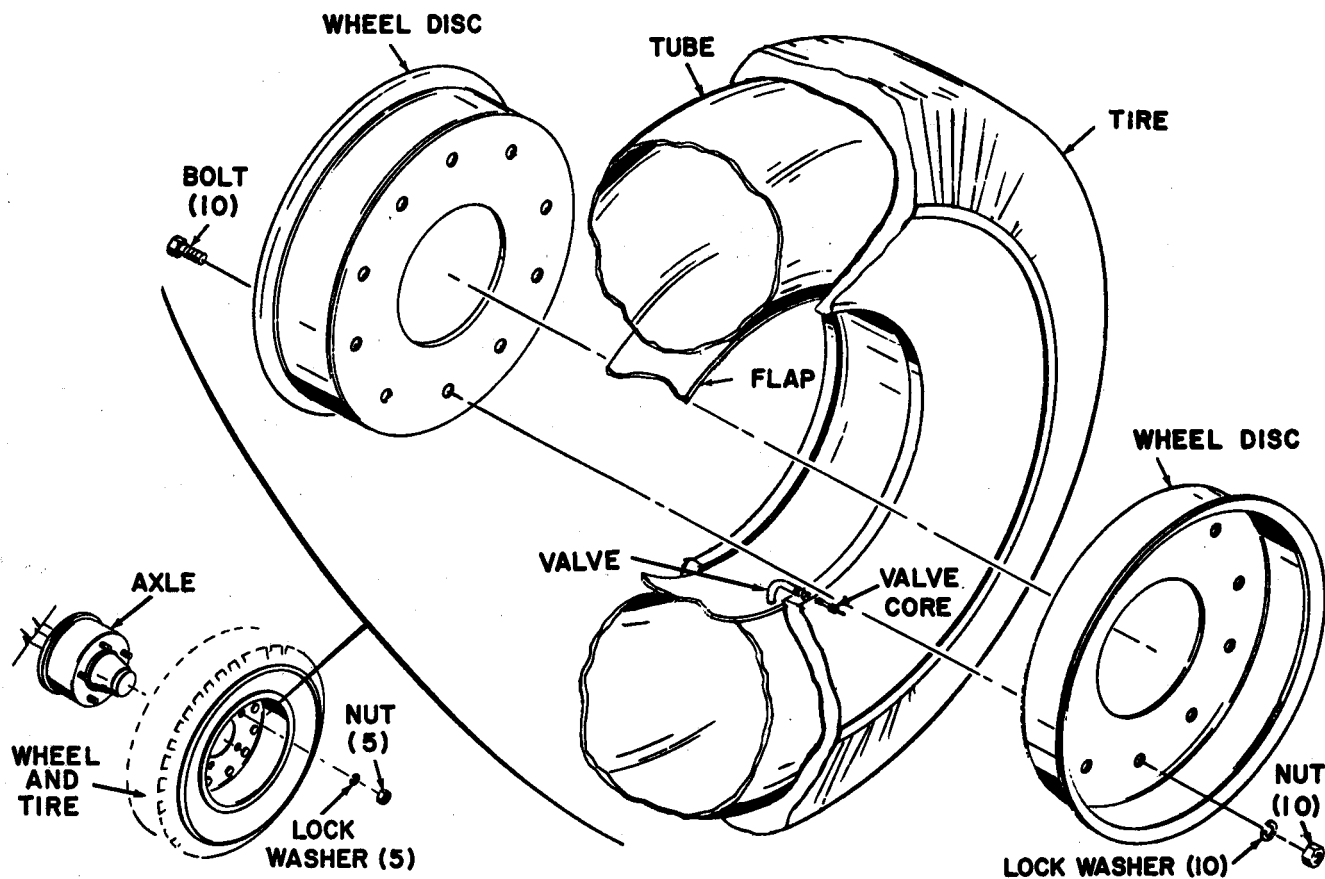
Wheel mounting kit wheels and tires, removal and installation
